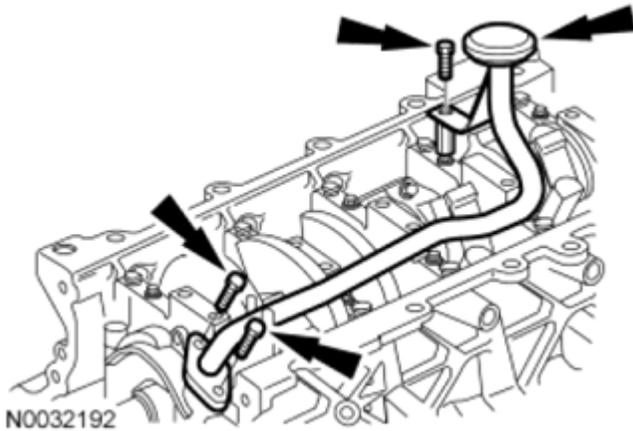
Removing Oil Pump Screen And Pickup Tube Bolts
